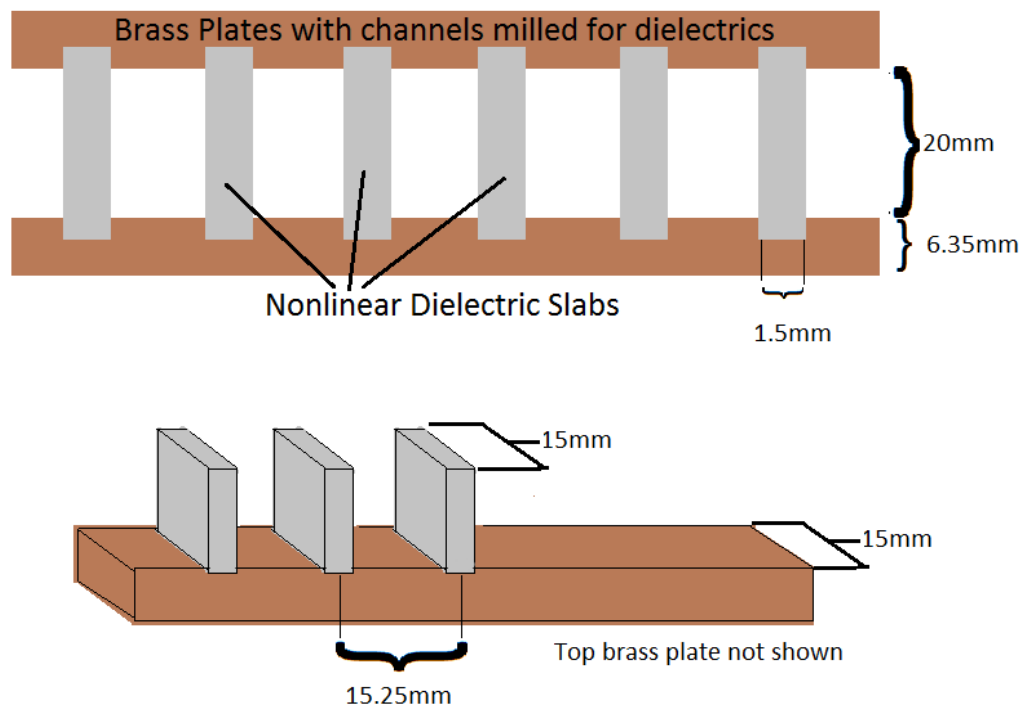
Parallel plate transmission line using the Ikezi geometry.
